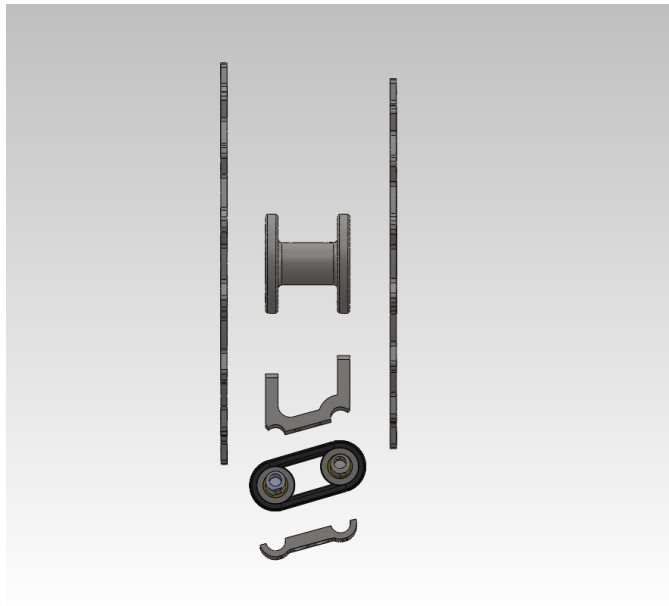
Exploded front view of the inner layer frame and tracked-roller construct.
